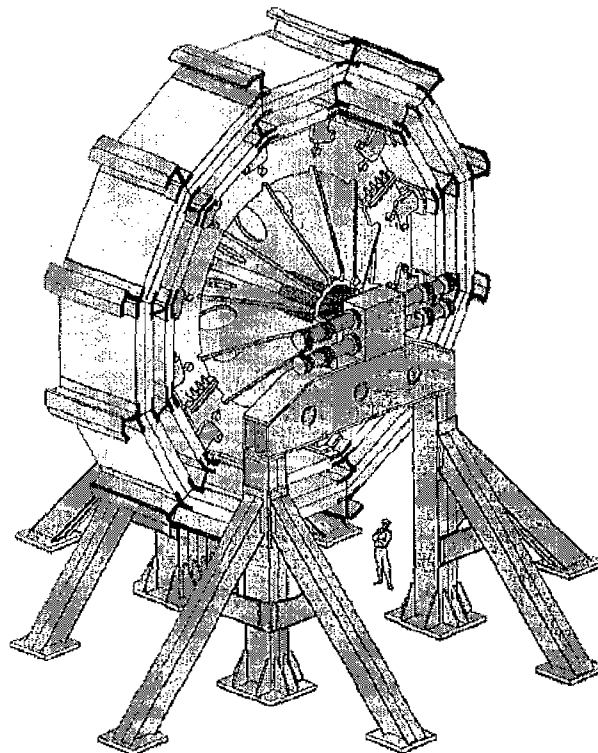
Perspective view of the Ferris-wheel arrangement for the assembly of the barrel rings, shown here with two layers of absorber.
